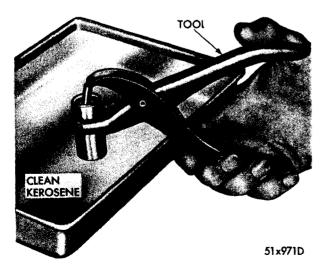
Testing the Hydraulic Tappet (Typical)
